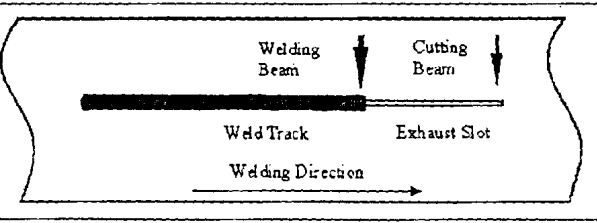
Top view of the laser lap welding using the forward slot (through sheets).
